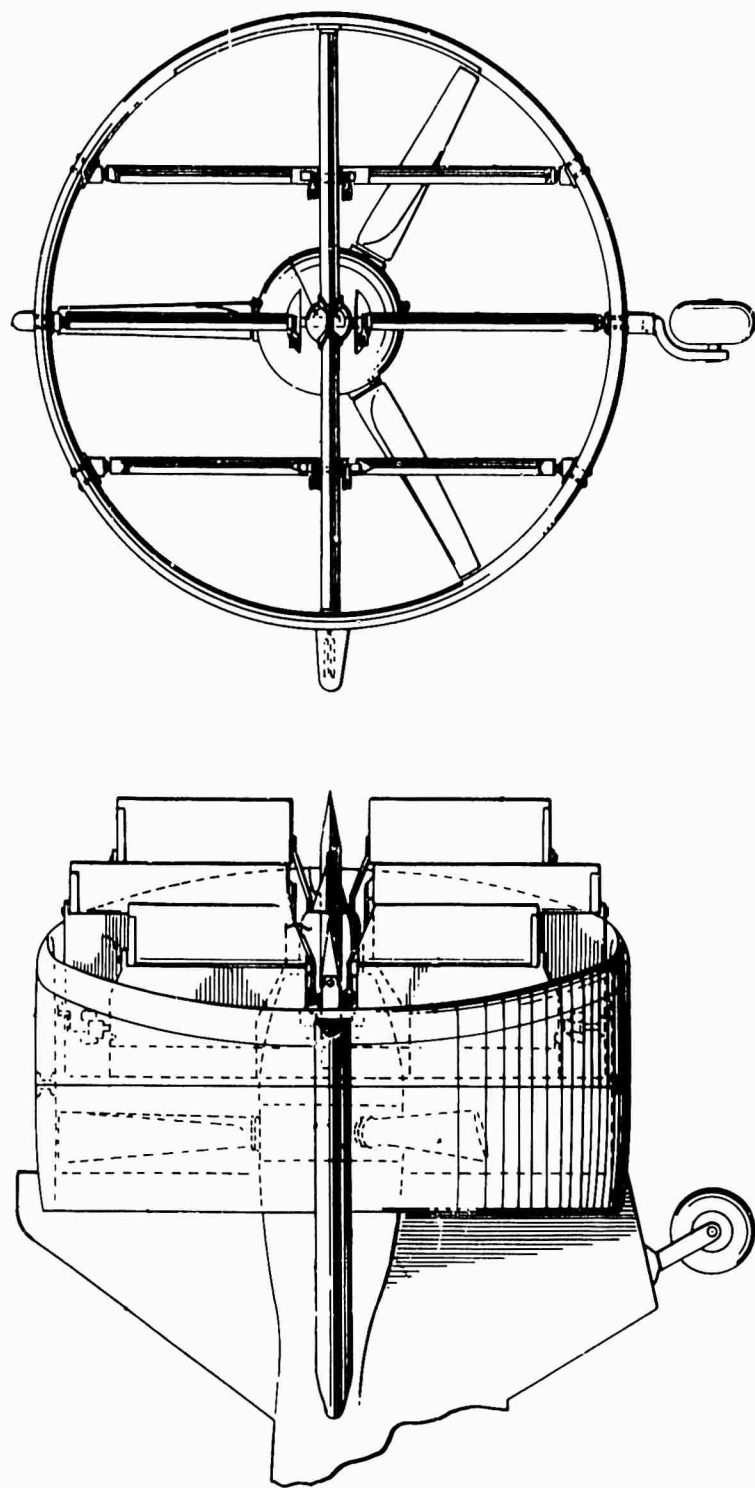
Directional Control Assembly, Pat. No. 3,260,482.
